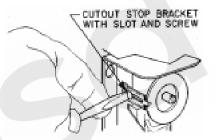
The thermostats have a screw type cutout stop. The stop screw must be loosened and moved to the stop setting desired. Tighten screw after setting is made.
